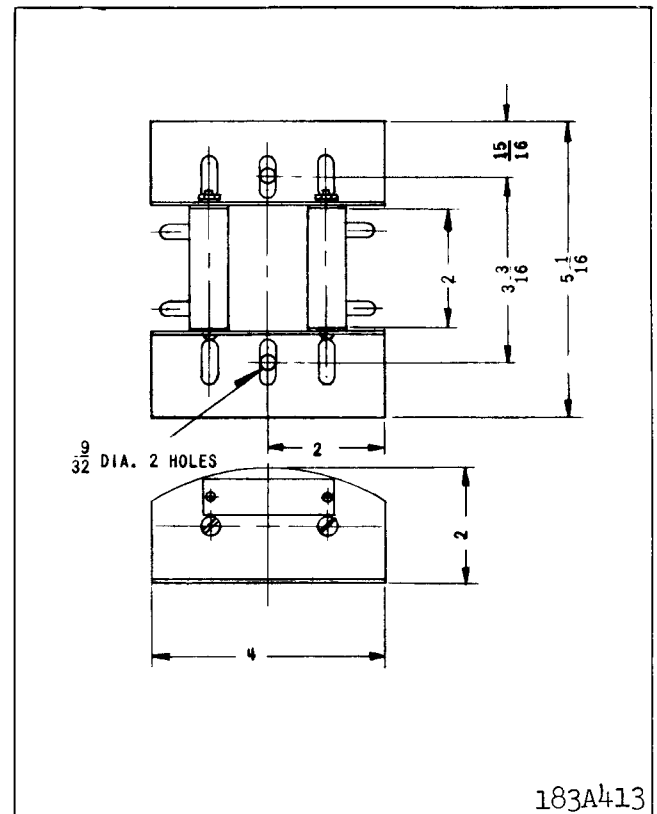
Outline & Drilling Plan for External Remote Trip Resistor Assembly.
